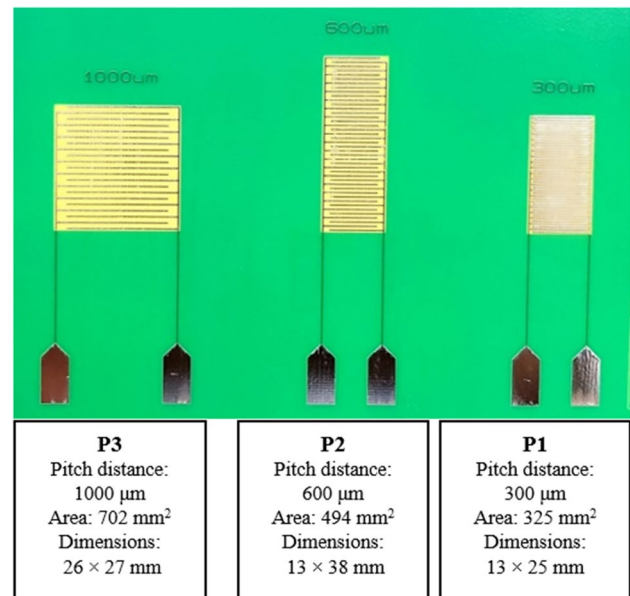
The overall view of SIR pattern PCB test boards with three different pitch distances.
